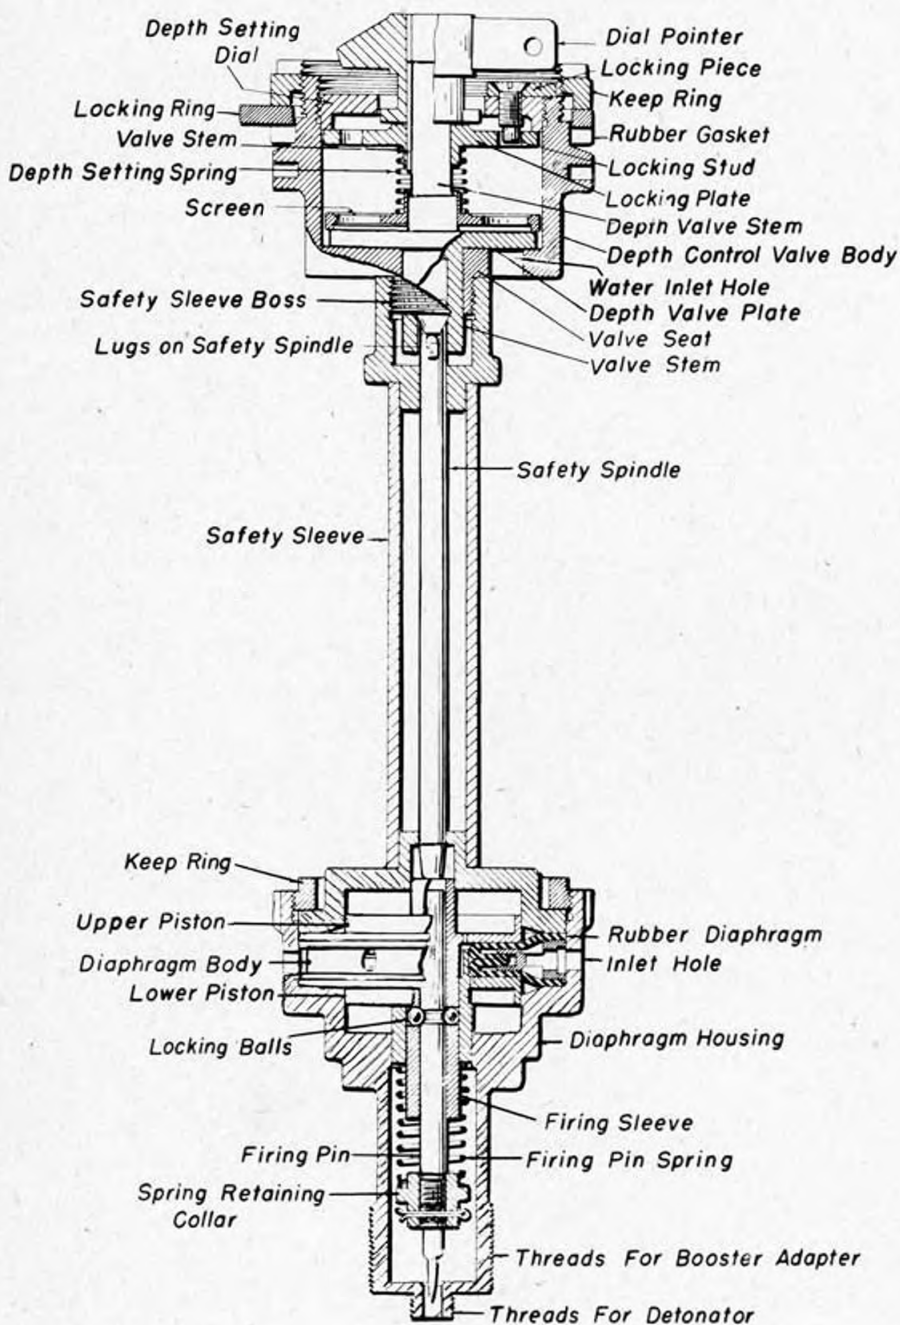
Type 2, Modification 1 Depth Charge Pistol, Sectional View
